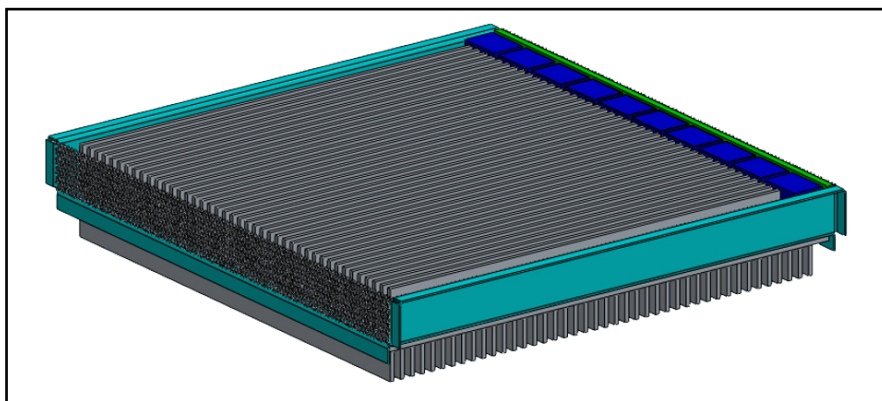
The Heat Sink Design Featured Top and Bottom Side Orthometric Fins. One Side is an External Heat Sink, the Other Side is an Internal Heat Sink
